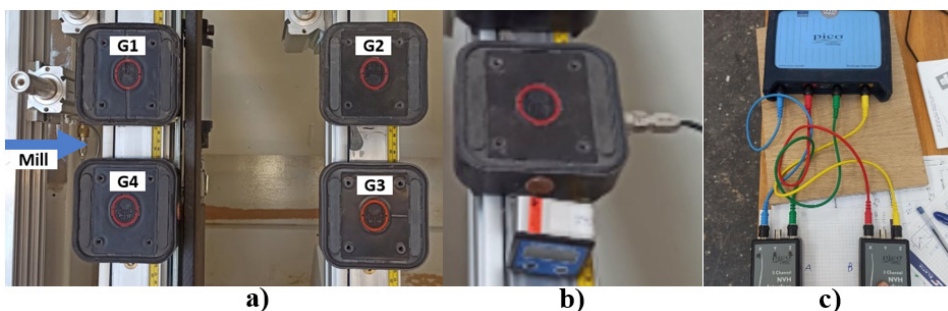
Measurement assembly. a) pneumatic grippers (G1-G4), b) magnetic attachment of acceleromer, c) NVH kit with PicoScope
